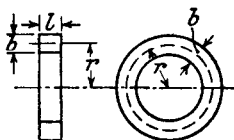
A Cylindrical Coil with Rectangular Section Winding Area.
